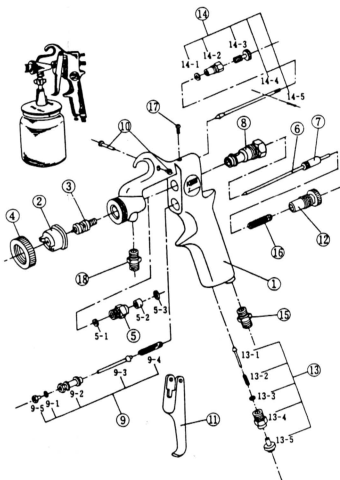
A Exploded view of the spray gun used in the experiment to spray the precursor into the reaction chamber as fine droplets.
